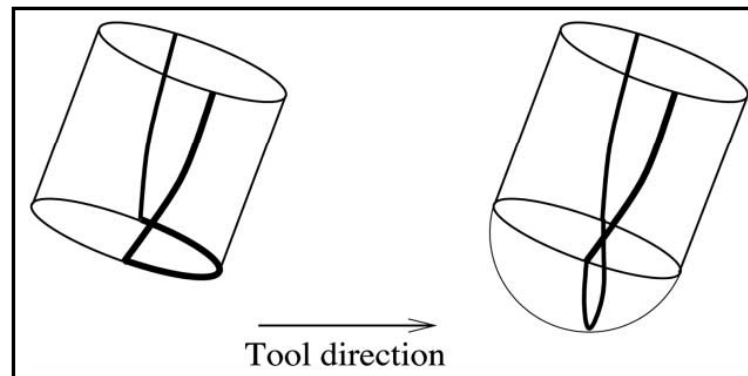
Grazing curve (the thick line) for the tool along tool direction [23].
